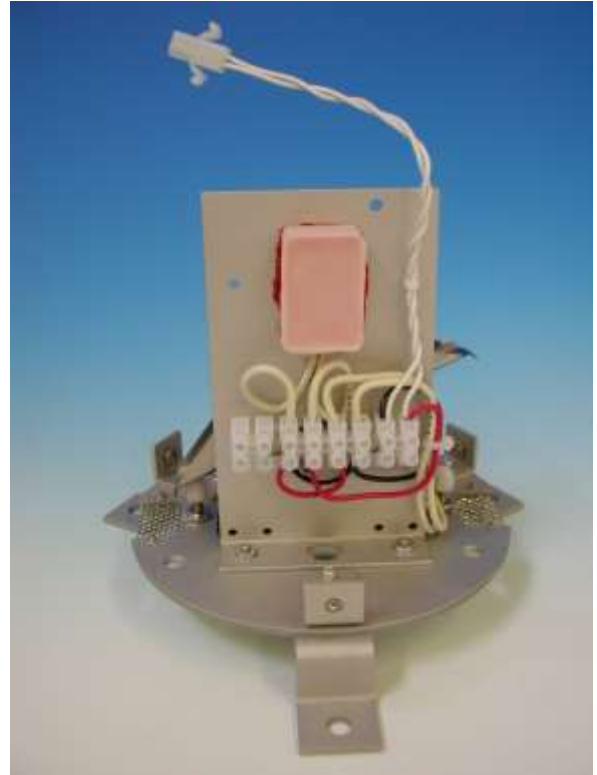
HEATER TERMINAL ASSEMBLY
